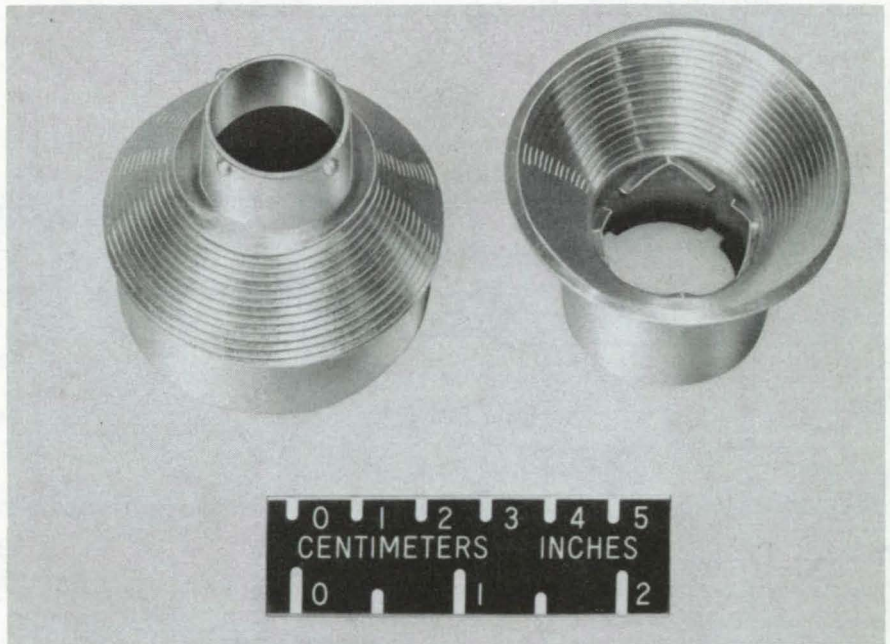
Steep Threaded Cones on joint sections align easily and tighten in less than one-quarter turn.
